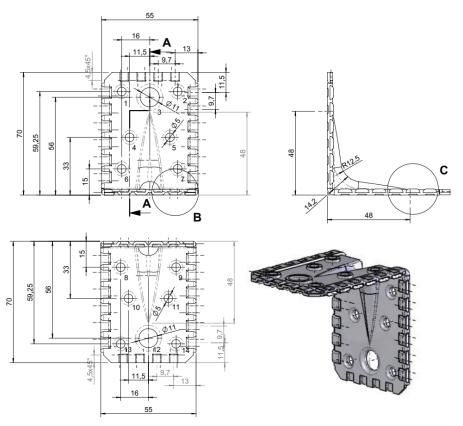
Dimensions of Angle Bracket 70 with rib, thickness 1,5 mm
